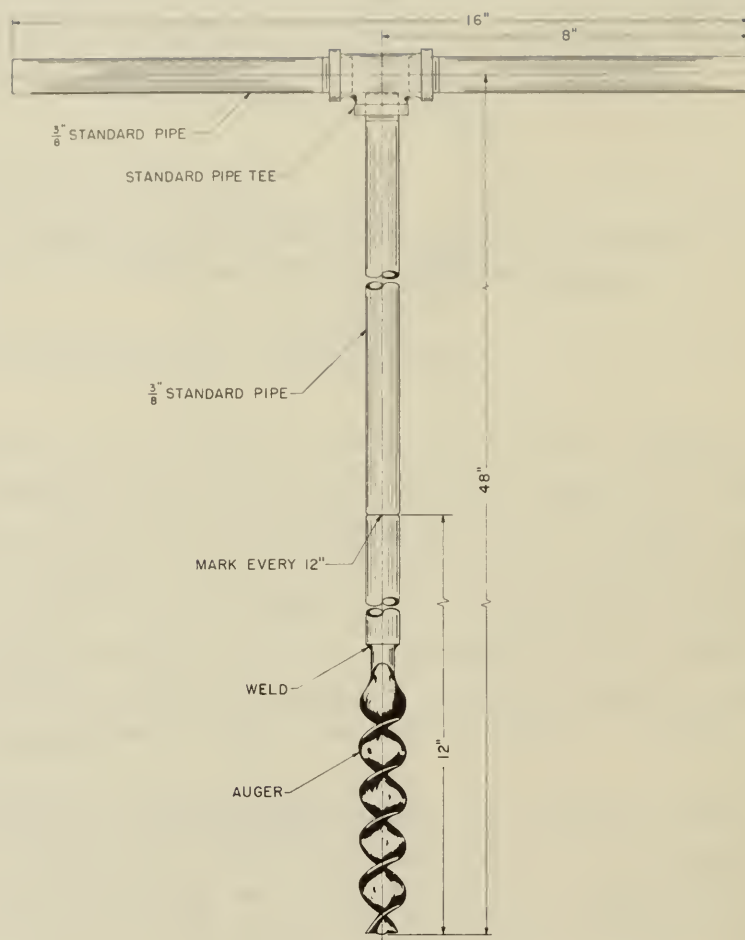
Plan for construction of a soil auger with a 1- or 1¼-inch wood bit and 3/8-inch standard pipe and T-union.
